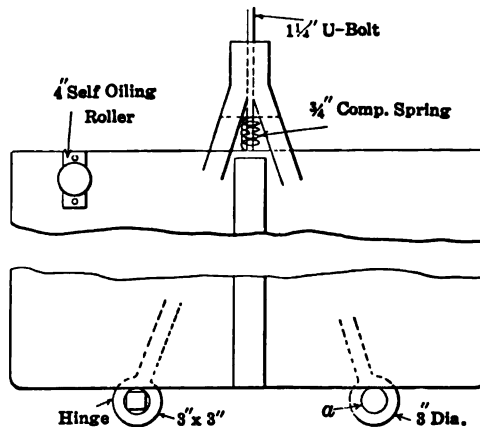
IMPROVED SKIP AT ADAMS IRON MINE.
